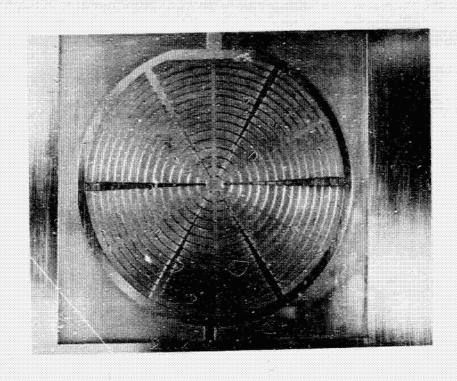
STAINLESS STEEL MASTER MOLD (ACTUAL SIZE)
